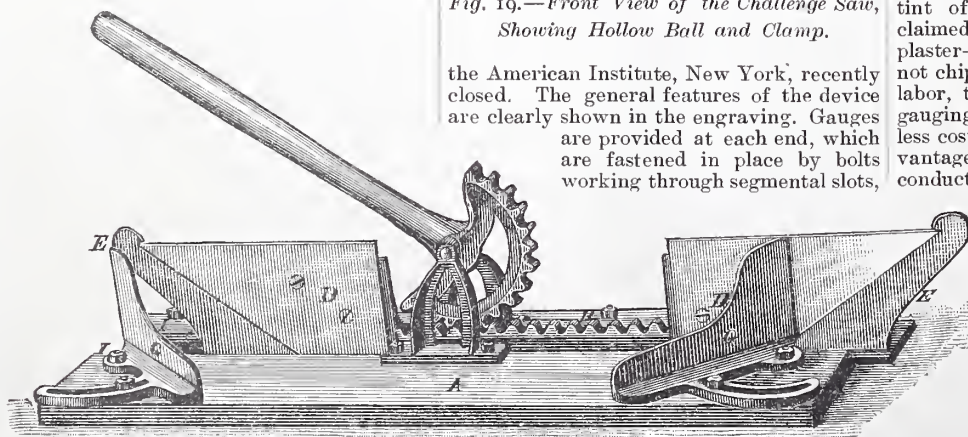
Schreppel's Adjustable Miter Planing Machine.
